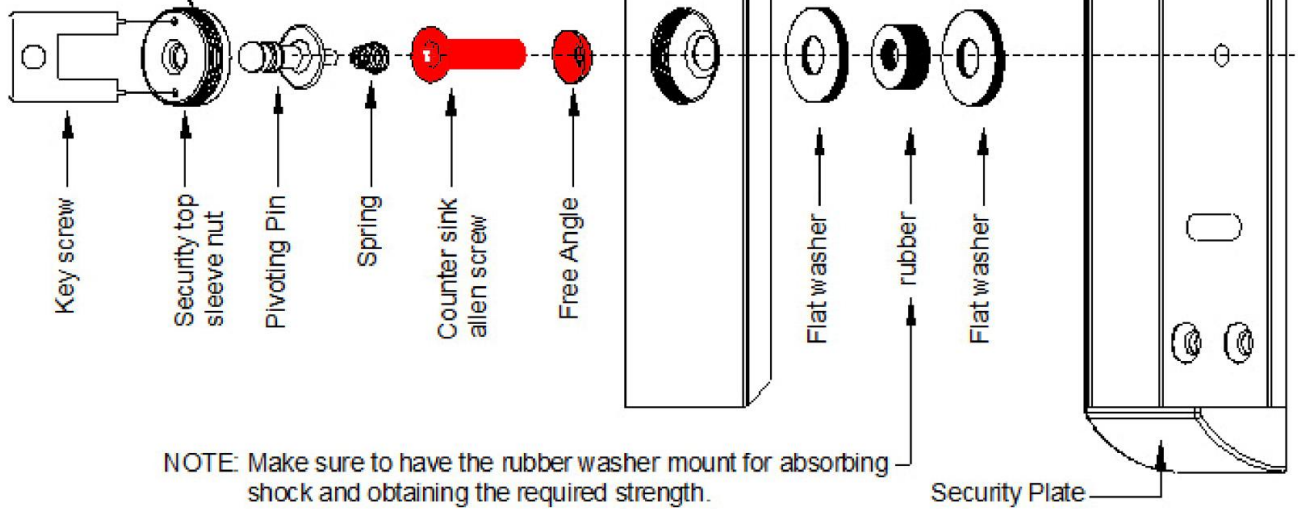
Illustration of MEM2400-LP with Stainless Steel U-Bracket (UBG 12-24-SS) installation for out-swing glass door with narrow door gap
